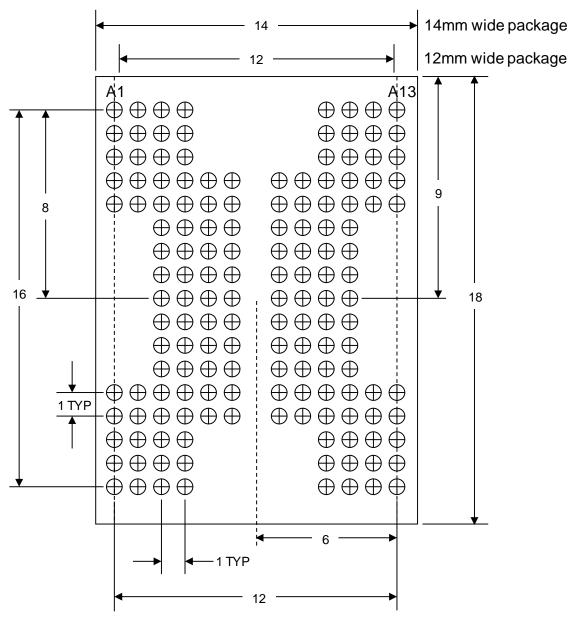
BGA-152 and BGA-132 ball spacing requirements (top view, dimensions in millimeters)
